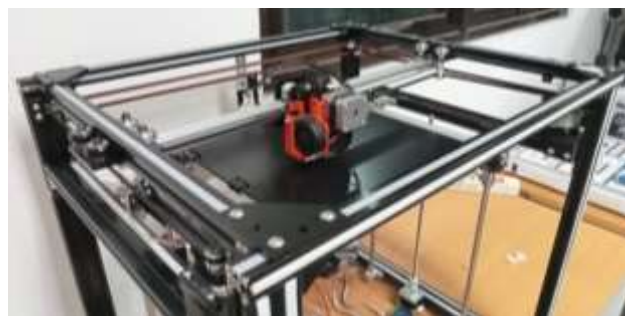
CoreXY Custom 3D Print Machine Print Area
